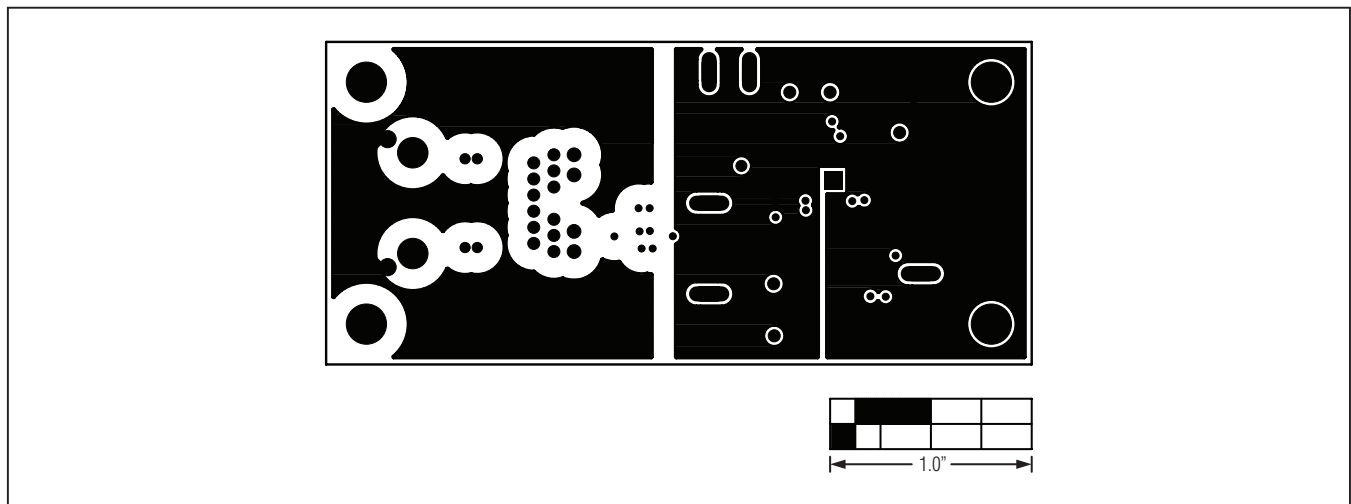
MAX5986A EV Kit PCB Layout—PGND Layer 2
